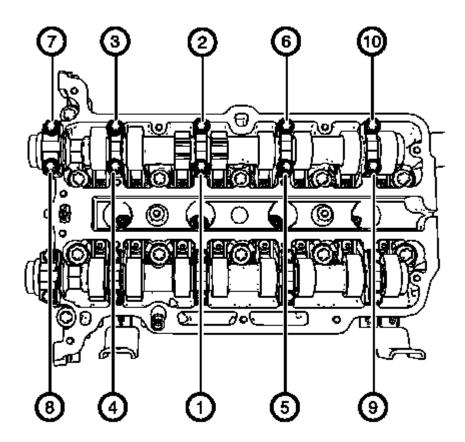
Intake Camshaft, Camshaft Bearing Caps And Bolts Courtesy of GENERAL MOTORS COMPANY
